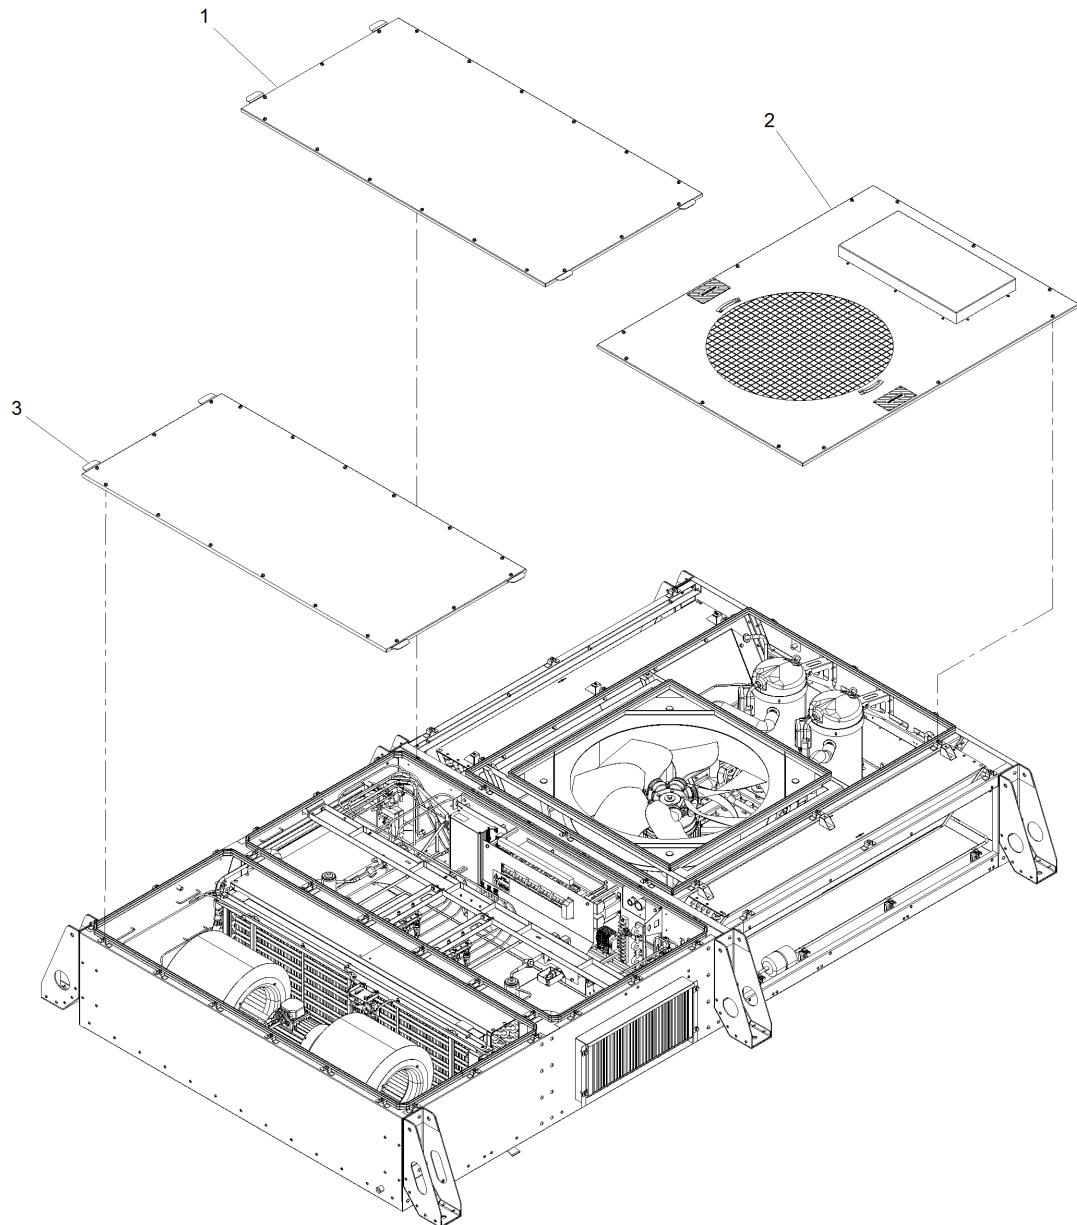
Clean and Inspect HVAC Equipment 30,000 Miles
